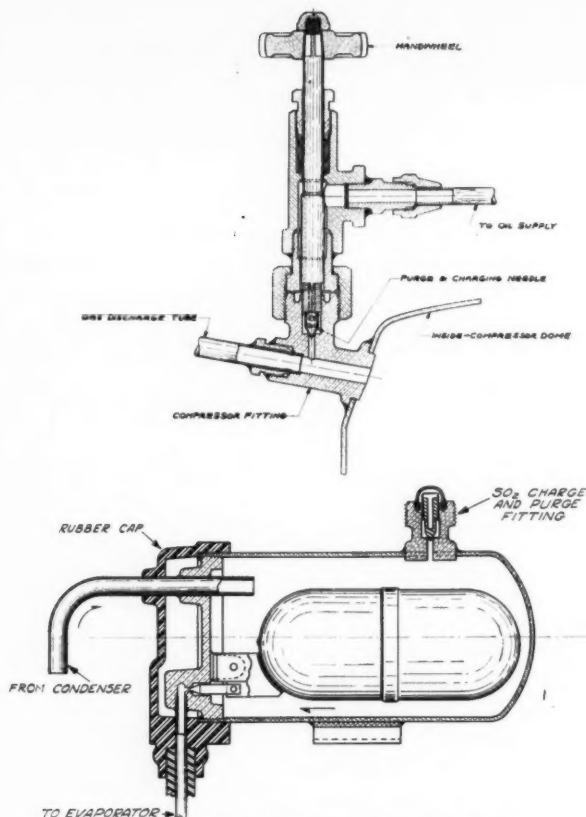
ABOVE: PURGE AND CHARGE VALVE.
